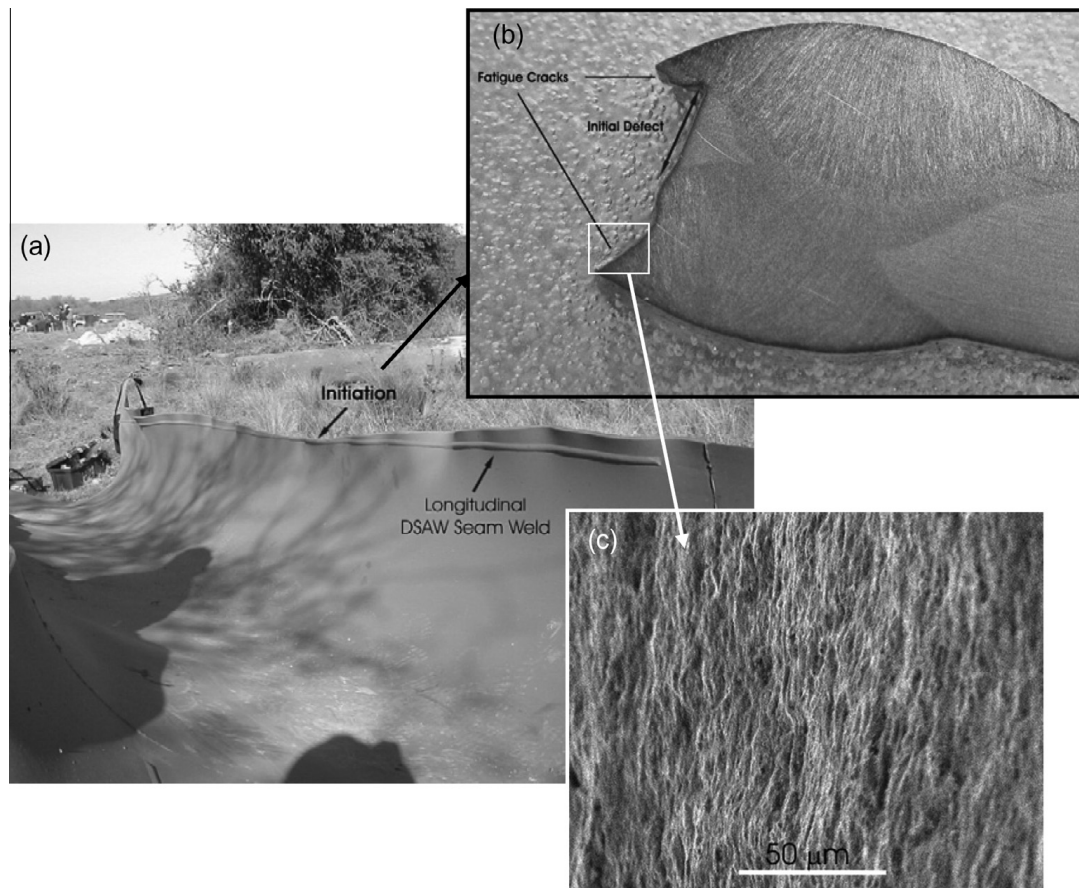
(a) Blow out of gas pipeline, (b) fatigue cracks propagated from embedded weld defect and (c) striation marks at fracture surface [16].
